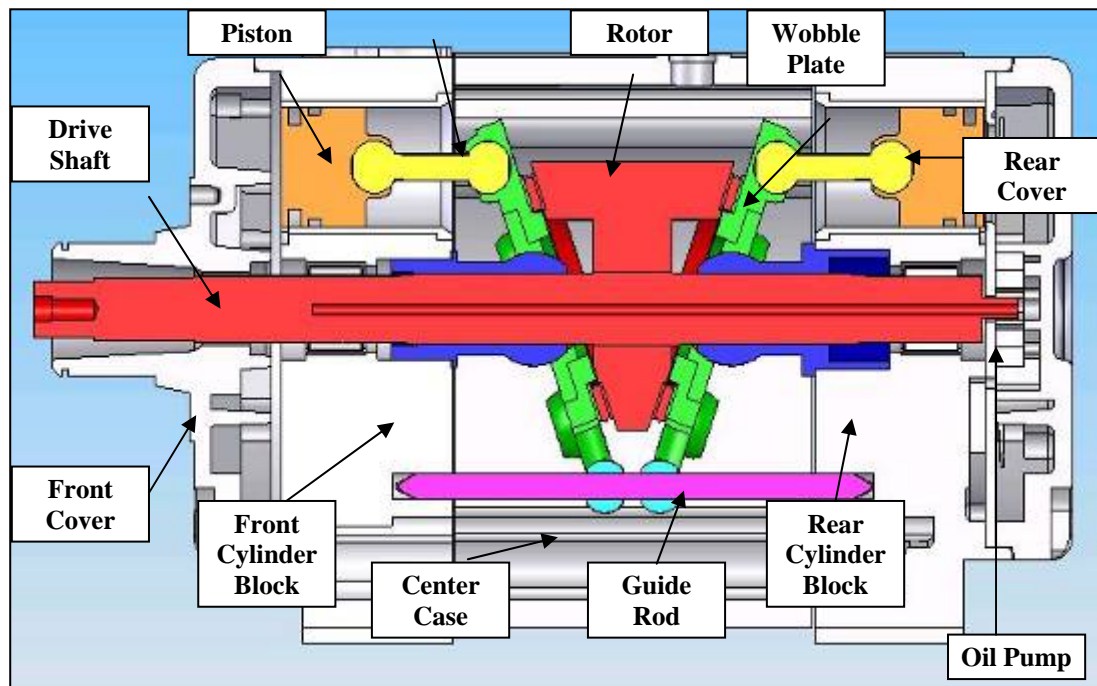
New Design of Symmetrical Wobble Plate Compressor
